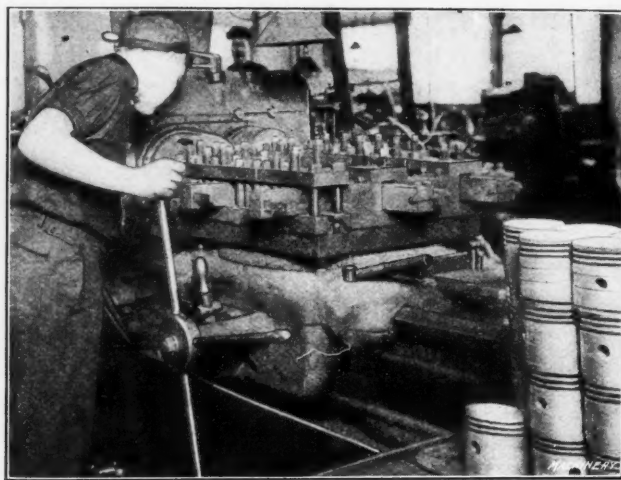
Machining Motor Cycle Pistons on the Double-spindle Flat Turret Lathe
